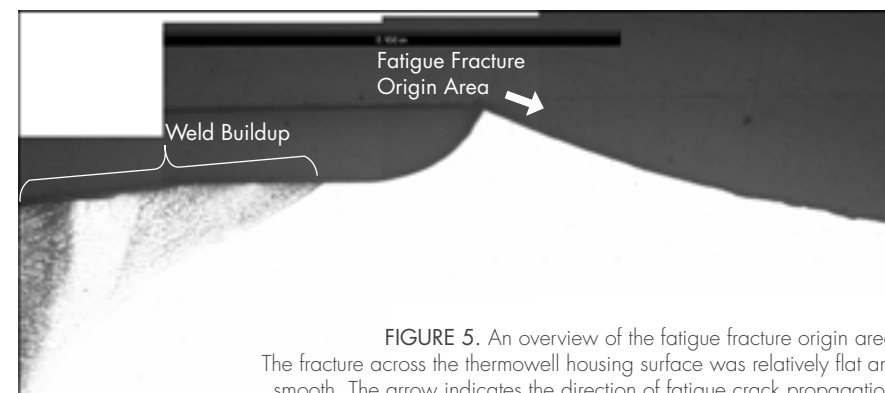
An overview of the fatigue fracture origin area. The fracture across the thermowell housing surface was relatively flat and smooth. The arrow indicates the direction of fatigue crack propagation.
